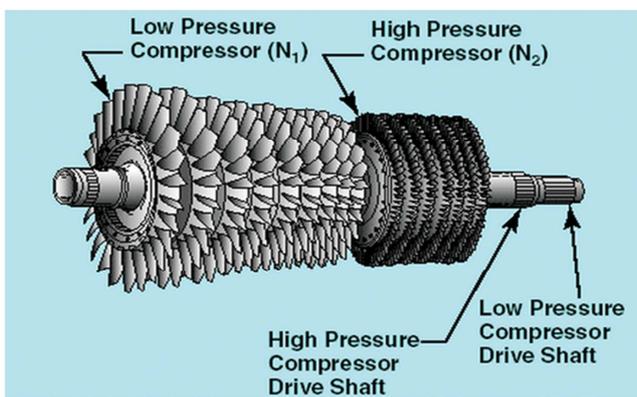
Typical Compressor Blade of an Aircraft gas turbine engine [20].
